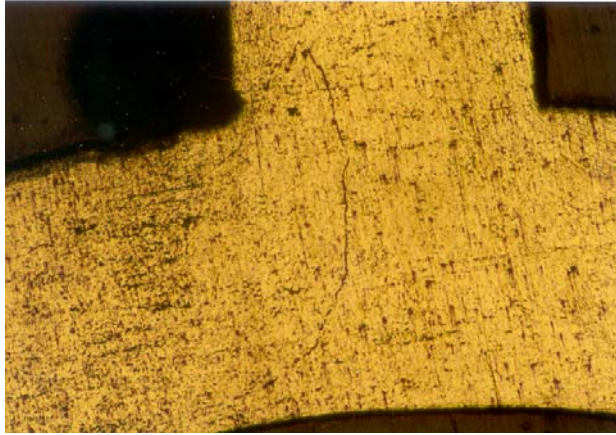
Photograph showing defect existence in fuel cladding.
